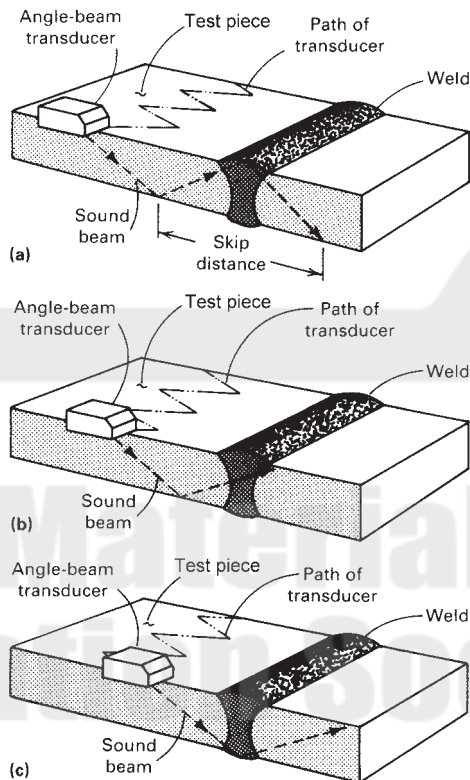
Three positions of a contact type of transducer along the zigzag scanning path used during manual angle-beam ultrasonic inspection of welded joints. The movement of the sound beam path across the weld is shown on a section taken along the centerline of the transducer as it is moved from the far left position in the (a) scanning path, (b) through an intermediate position, (c) to the far right position. Source: Ref 1
